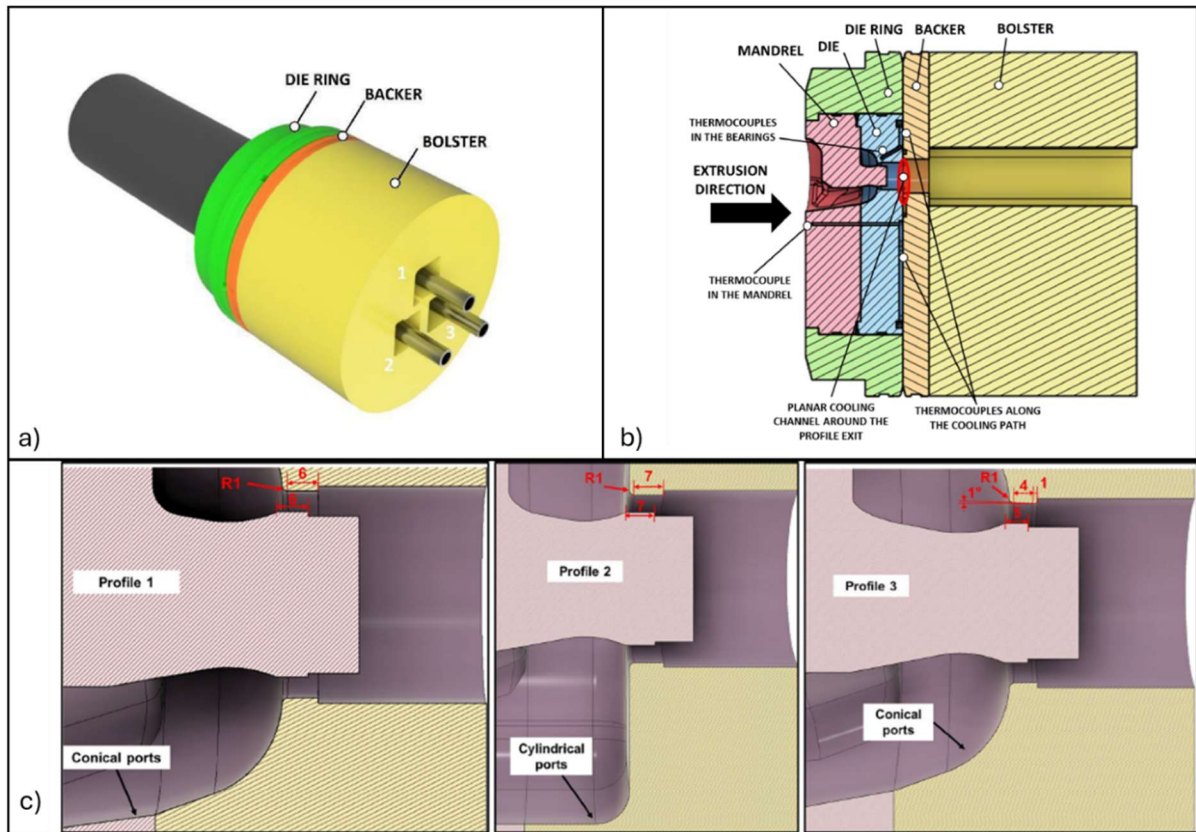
a) 3D drawing of the billet and tools set-up; b) Die assembly; c) Dimensions of different types of die bearings. [103]
